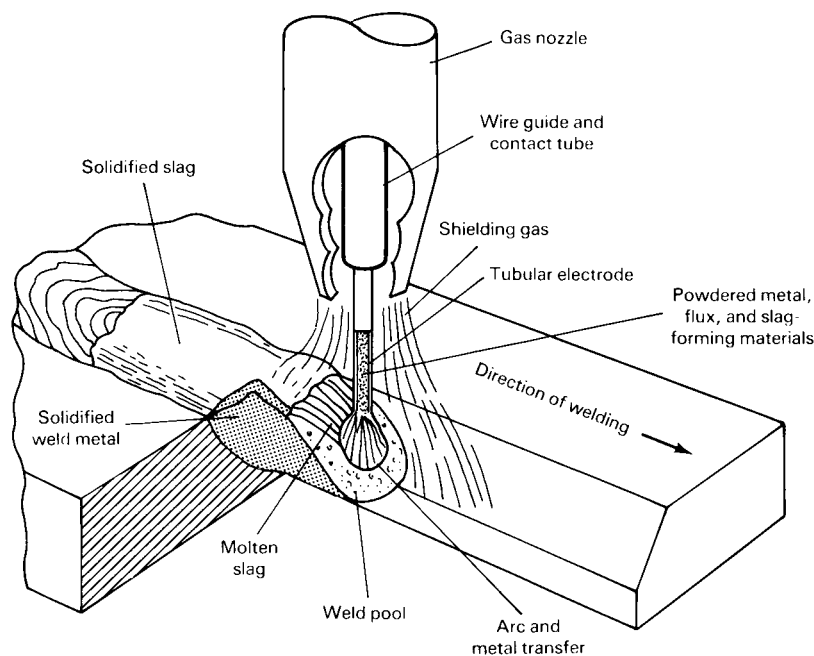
Gas-shielded flux cored arc welding. Source: Ref 1
